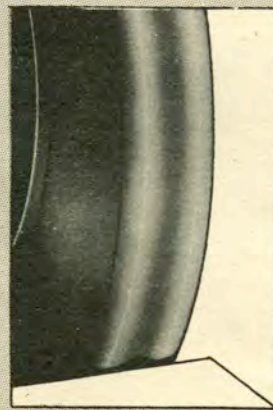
Dressing a drill on a grooved wheel ain't funny — you got to keep a straight face.
